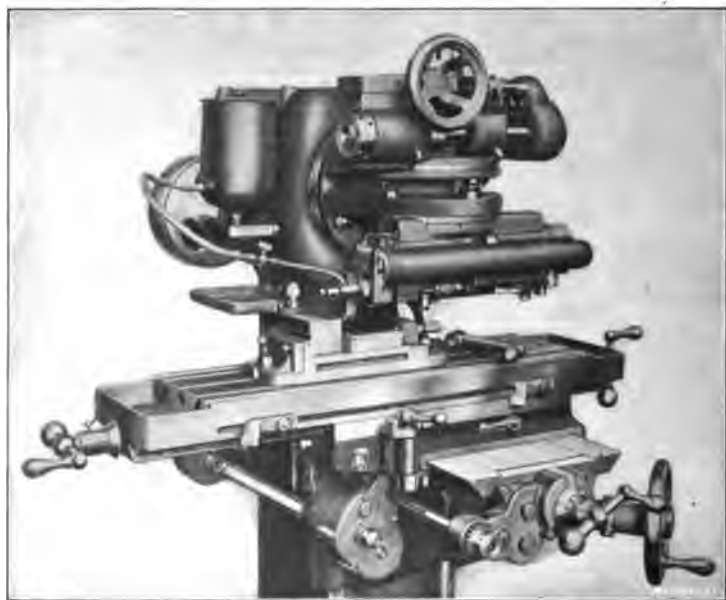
Cochrane-Bly Universal Shaper and Milling Machine
